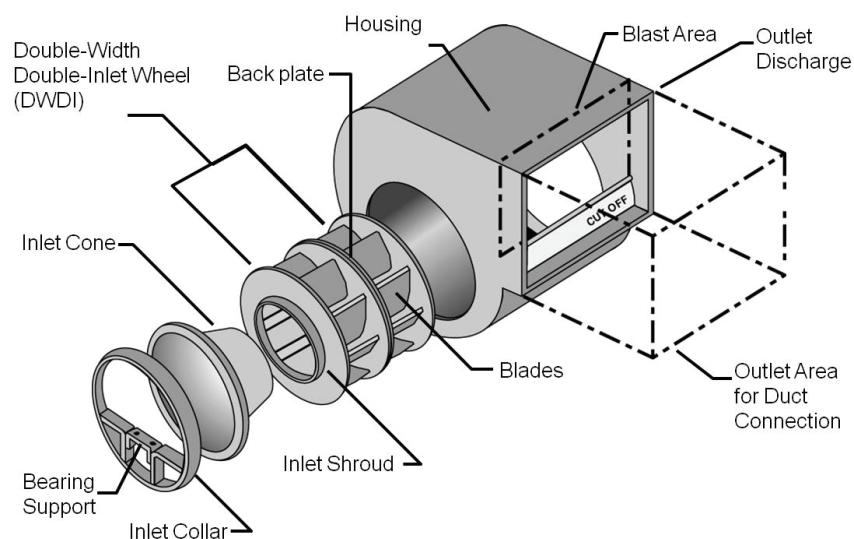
Double-Width, Double-Inlet Fan Wheel
